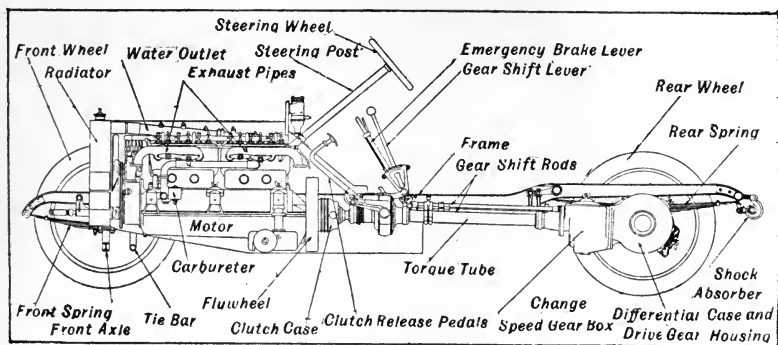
Side Elevation of Sheffield-Simplex Six-Cylinder Chassis; a Typical Design of English Derivation.
